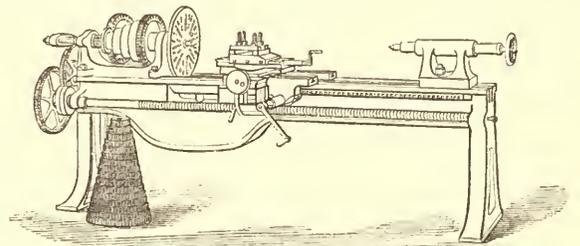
Self-Acting Screw-Cutting Lathe.
